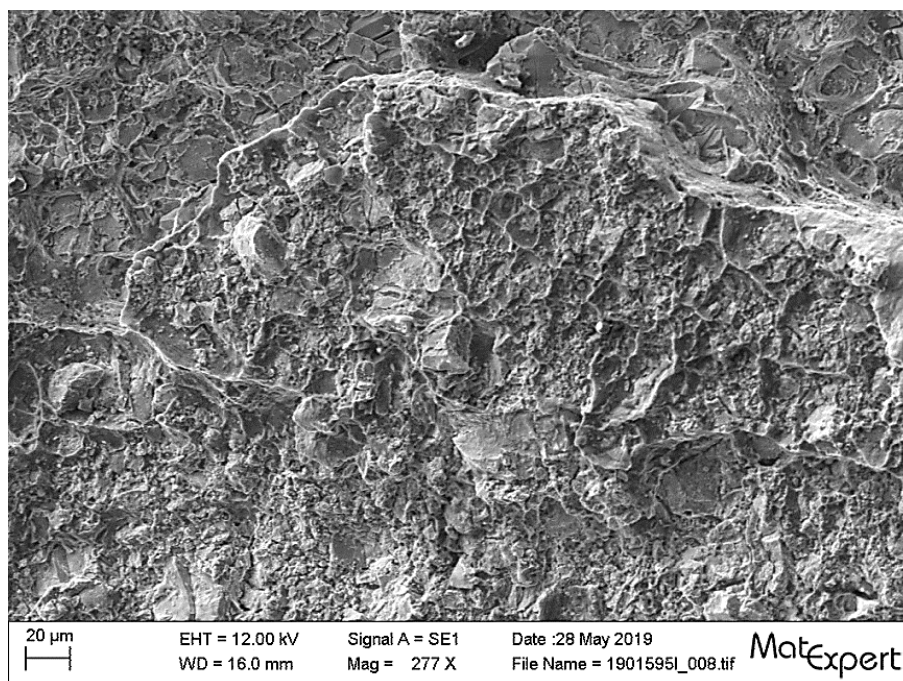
Mixed fracture featuring honeycomb and quasi-cleavage fractures.
